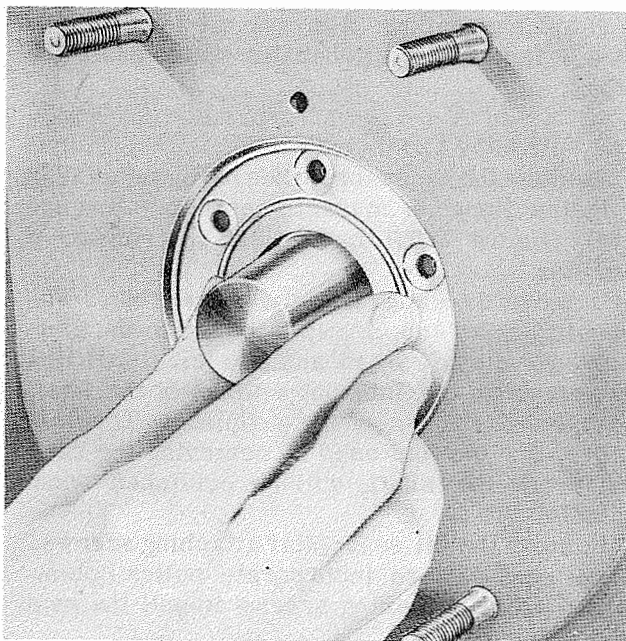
Installing Magneto Drive Gear Oil Seal Assembly
